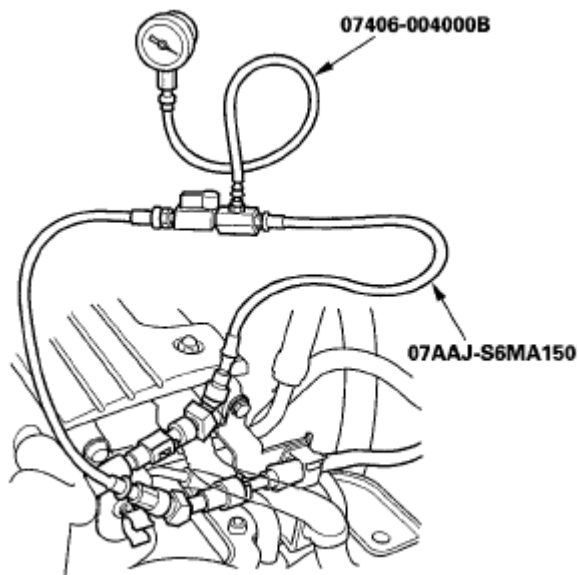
Attaching Fuel Pressure Gauge Set And Fuel Pressure Gauge
